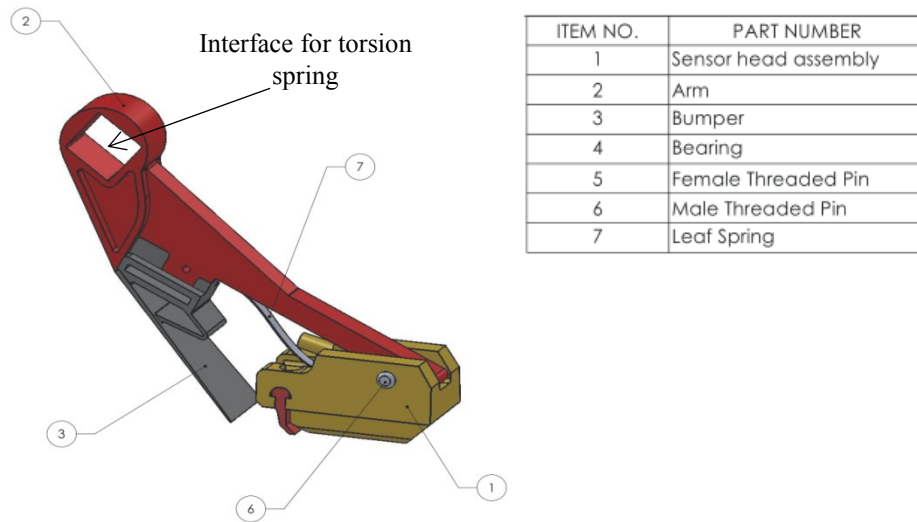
An example sensor arm subassembly module<sup>7</sup>
